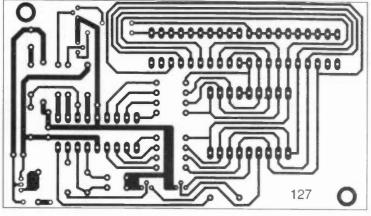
Printed circuit board component layout and full size copper foil master for the PIC Digital/Analogue Tachometer.
